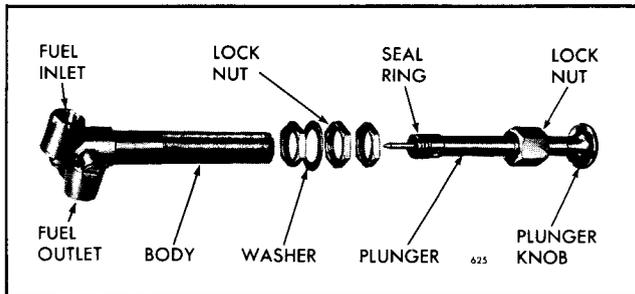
Fuel System Priming Pump and Relative Location of Parts
